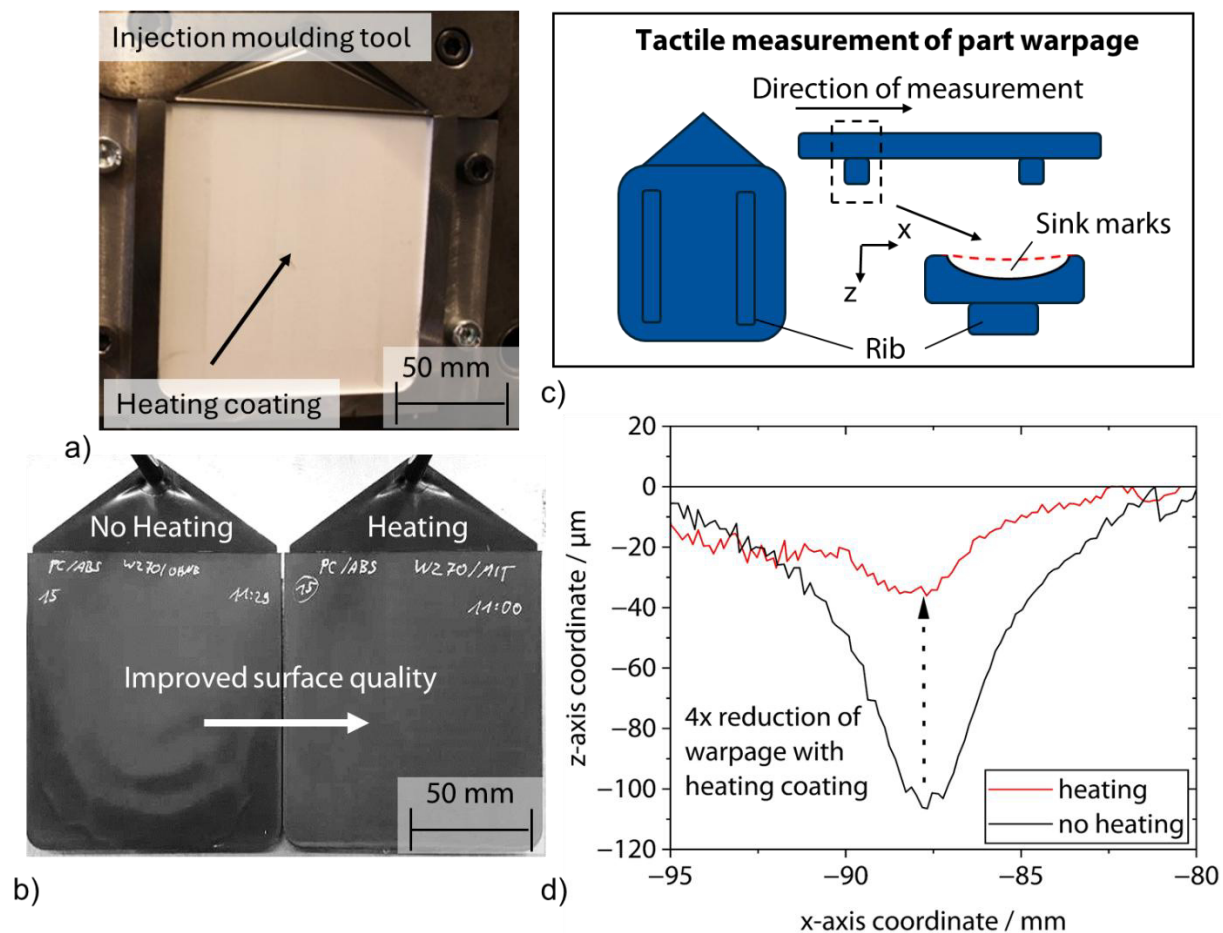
a) Injection moulding tool with integrated heating coating. Taken from [Sch24]. b) Improved surface quality in parts produced with active heating coatings c) Schematics of part geometry and tactile measurement d) Tactile measurements of parts fabricated with heating coatings. Data from [FHK+21]
